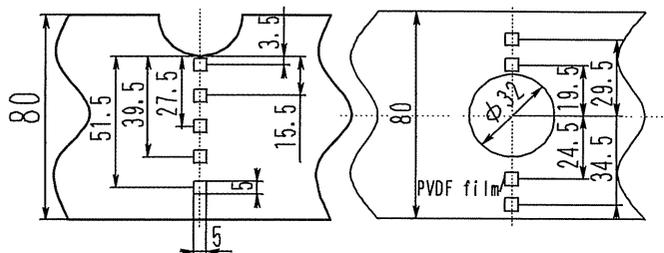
PVDF strain gauges on the half circular edged plate and center holed plate specimens
